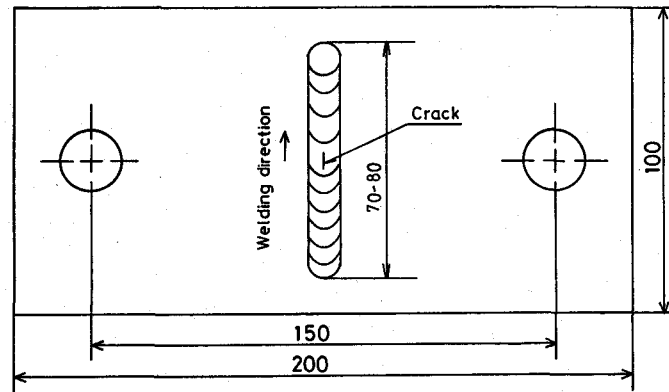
Shape and dimension of tensile cracking test specimen.
